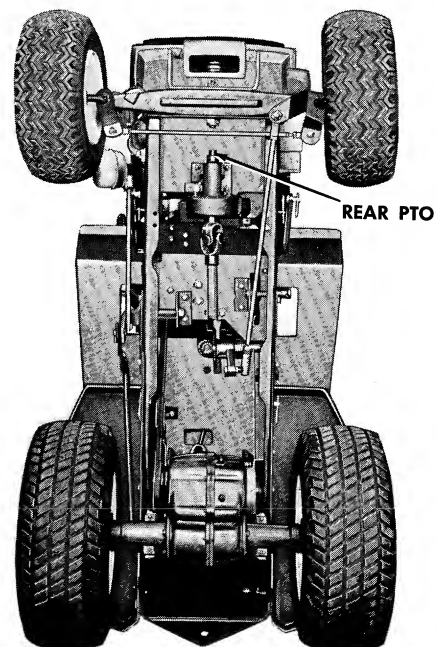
REAR PTO SHOWN WITH DRIVE SHAFT ATTACHED
